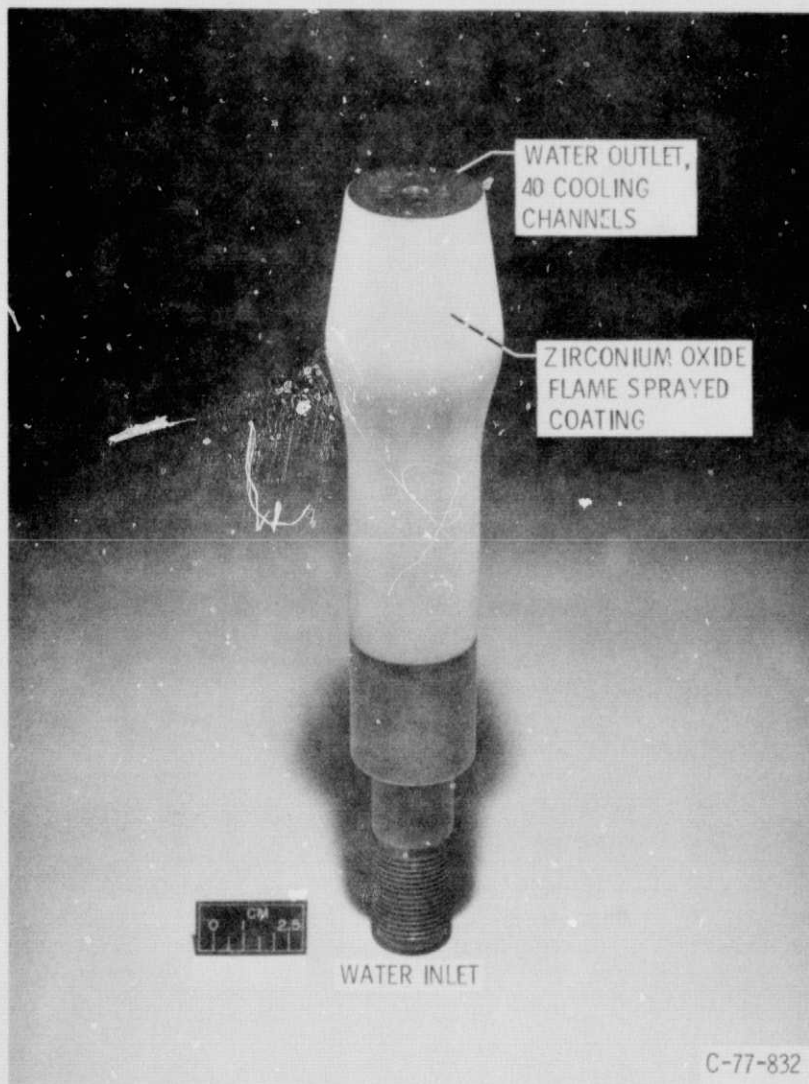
Ceramic coated, water cooled centerbody for 15.24 cm (6.0 in.) cylindrical thrust chamber.
